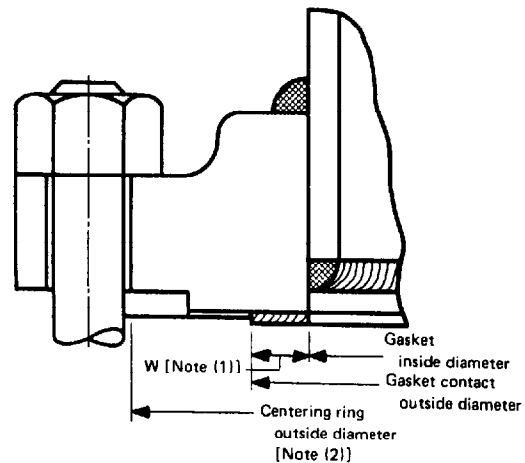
³ SMALL TONGUE WIDTH GASKET WITH GASKET I.D. EQUAL TO PIPE O.D., WITH CENTERING RING
